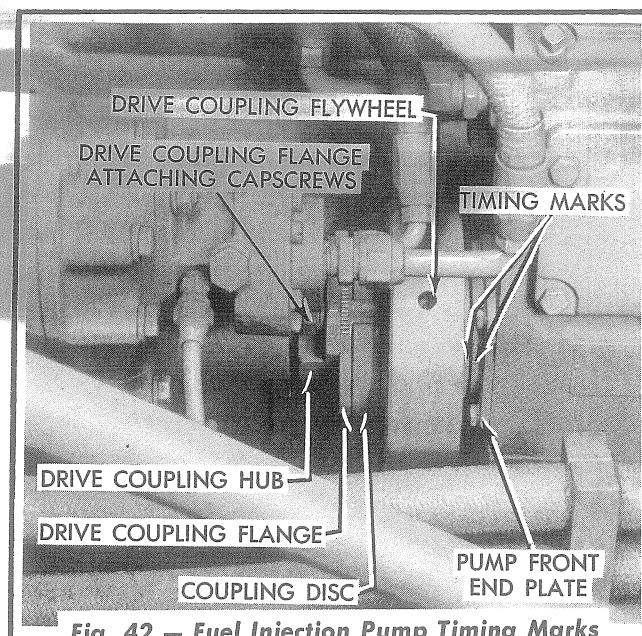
Fuel Injection Pump Timing Marks (Tractors Serial No. 4001 and Above)
